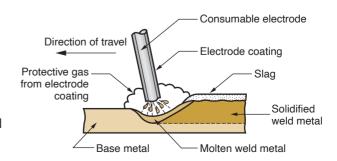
Shielded metal arc welding (SMAW).
